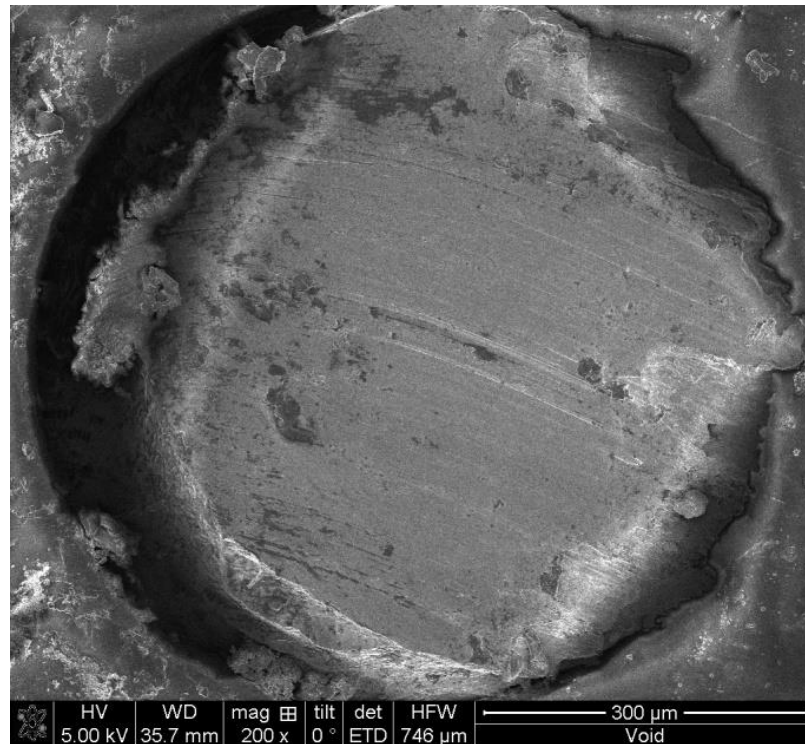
Fracture surface of a fatigued solder ball
